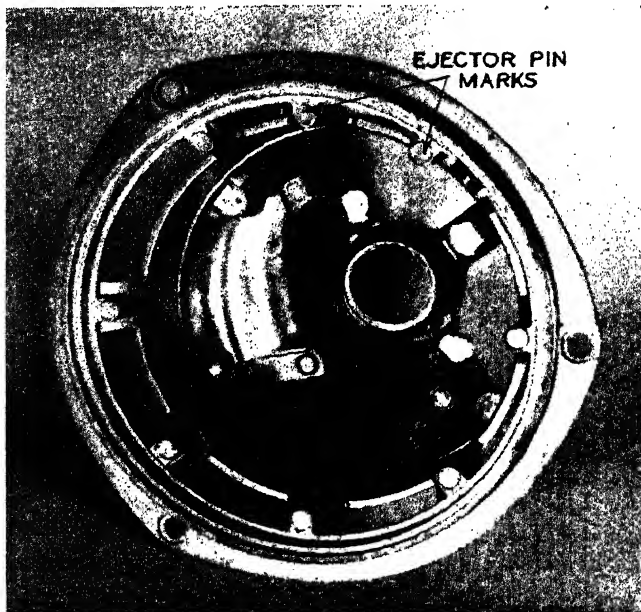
Pressure die-cast aluminium alloy motor body illustrating ejector pin location
